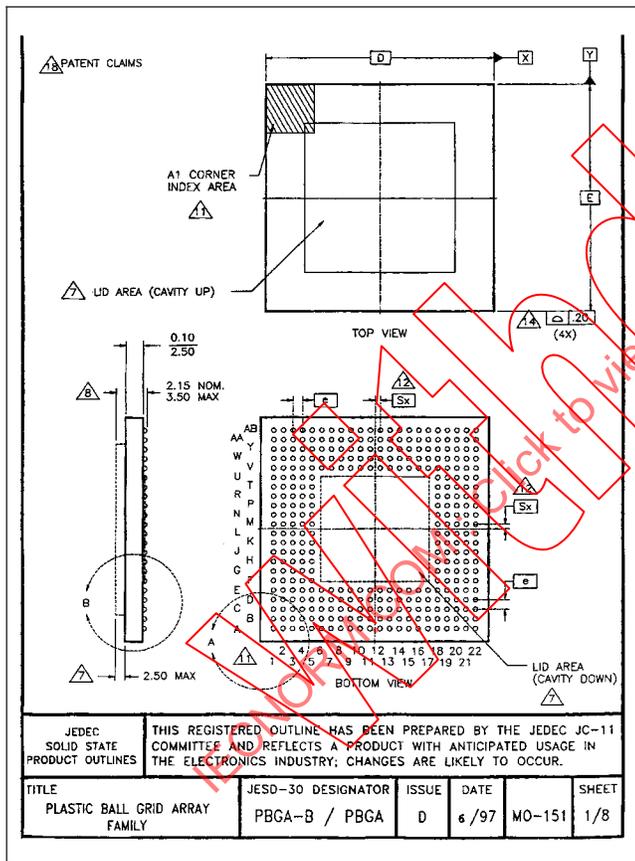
Physical Outline of BGA Package Specifications (Ref. JEDEC Publication No. 95)
